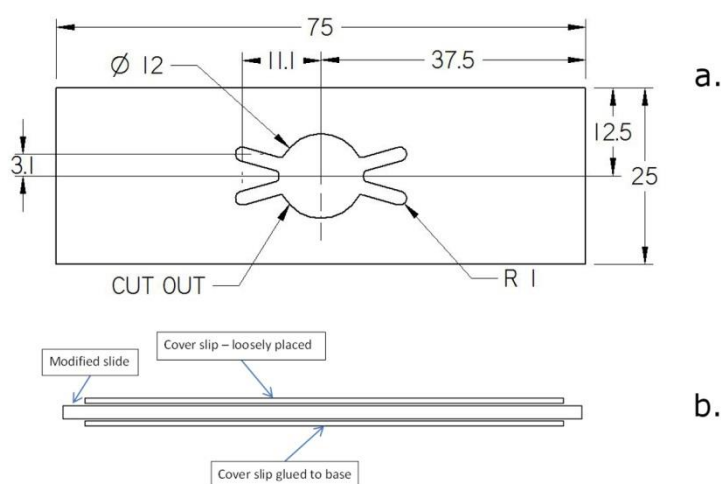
Modified microscope slide used for exclusion zone birefringence studies. Hole cut detail (a) and construction of the modified slide assembly (b).
